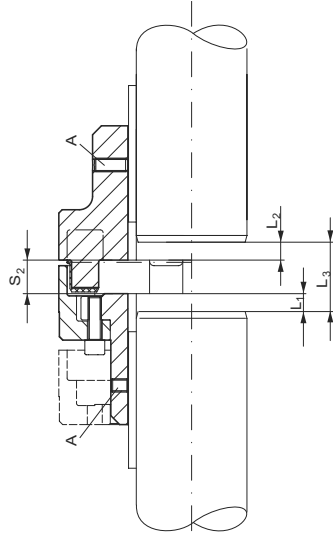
Mounting dimensions of the Nor-Mex coupling on the HSS (input shaft) – motor adapter
